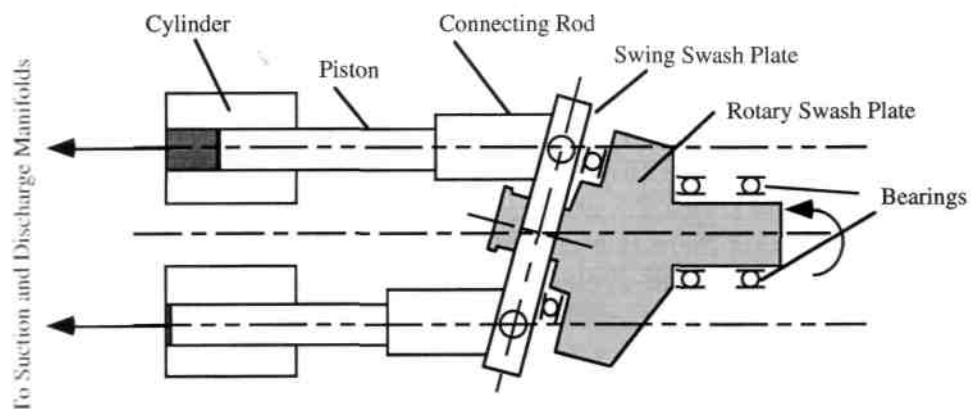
Schematic of a pump using a swash plate drive (Summer, 1995)
